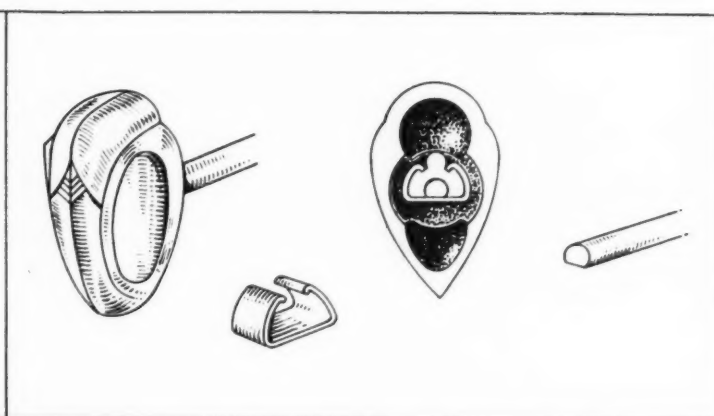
Switch Handle with "Speed Clip" Fastening for D-shaped Shaft
